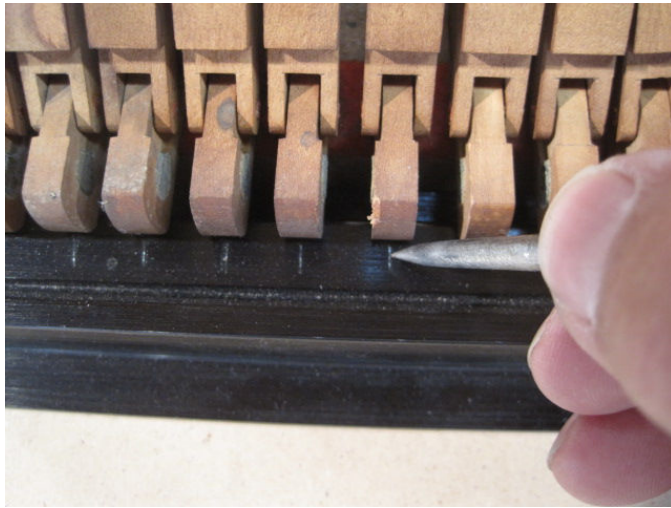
One way (not necessarily the right way) to mark the side-to-side position for screw holes.
